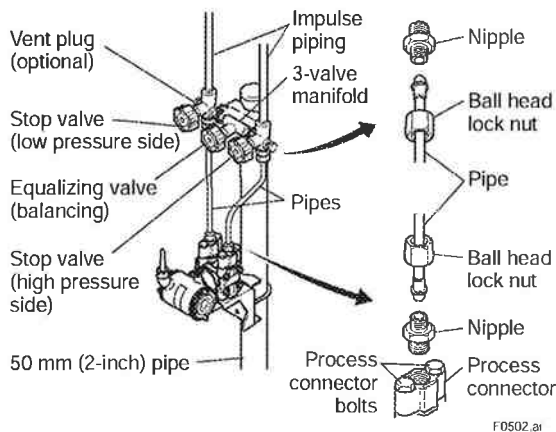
3-Valve Manifold (Pipe-Mounting Type)
